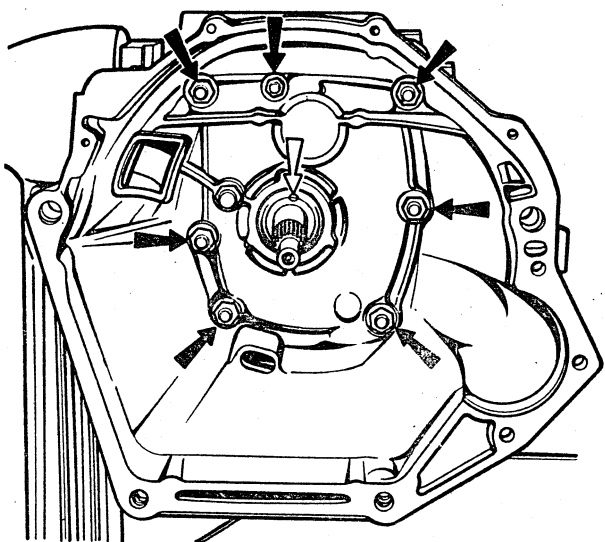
Clutch Housing, Inside View. Black arrows show housing to gearbox nuts. White arrow shows hole in front cover for draining oil from gearbox housing to prevent oiling of clutch discs
